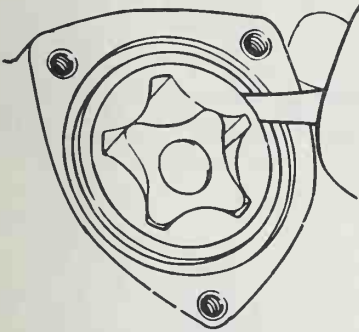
Outer rotor to oil pump housing clearance should not exceed 0.24 mm. Measure as shown.
